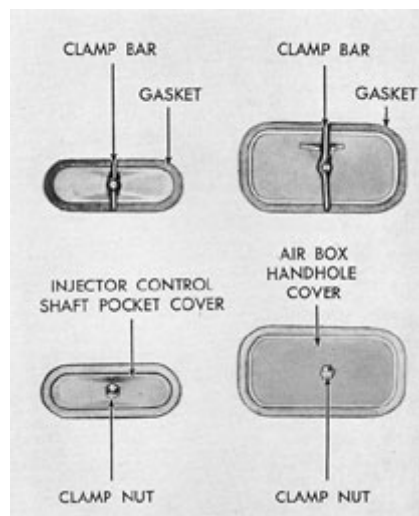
Injector control shaft and air box handhole covers, GM.
